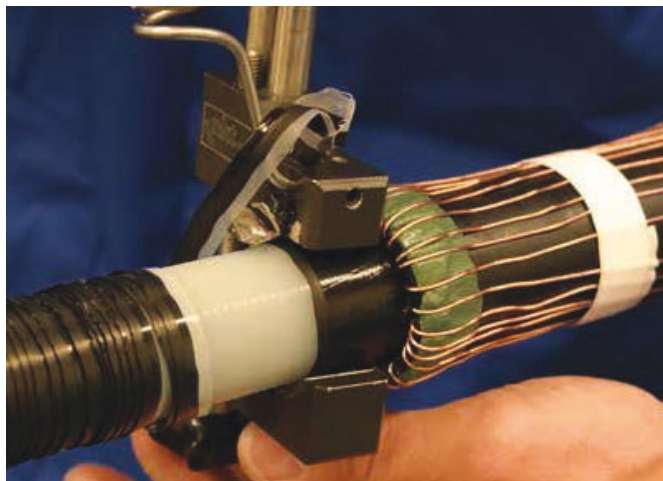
This cutting tool creates a tapered screen edge at the selected position
